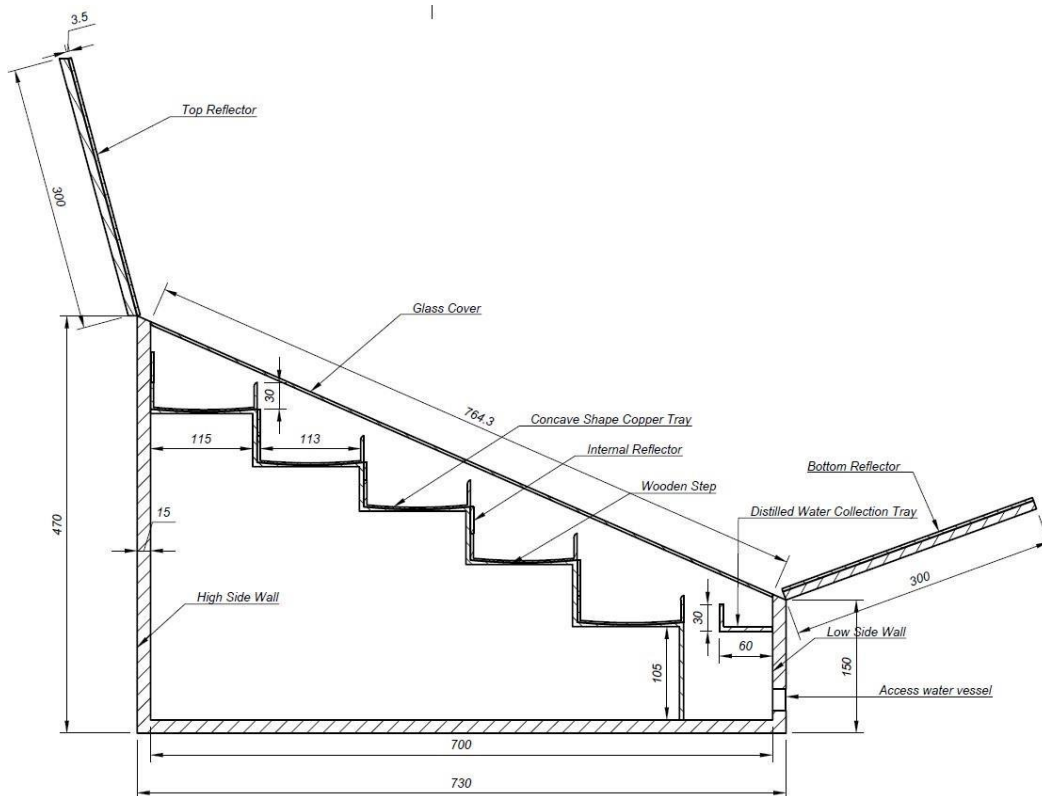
Side View of Solar Still (Unit is Millimeter).
